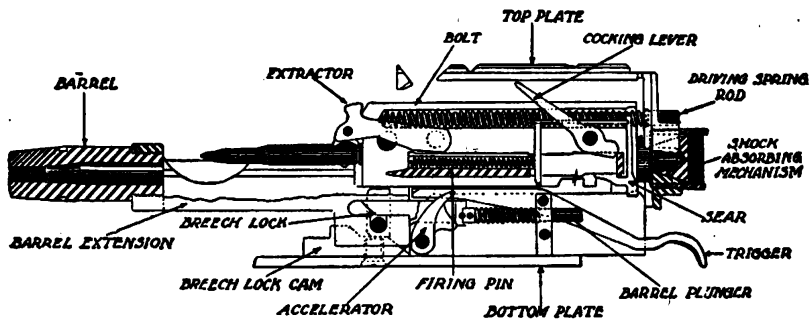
Caliber .30 machine gun—moving parts in rear position.
